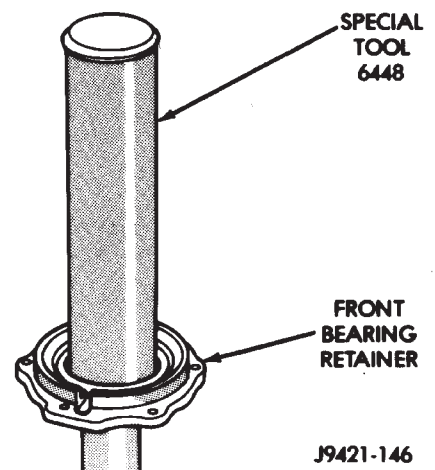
Installing Oil Seal In Front Bearing Retainer
